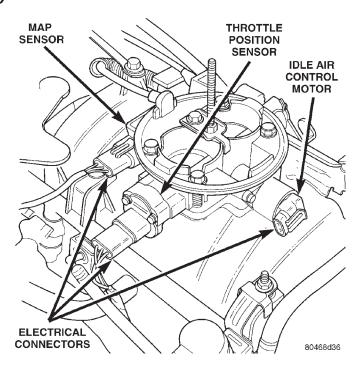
MAP and Throttle Position Sensor Location—5.2L Engine
